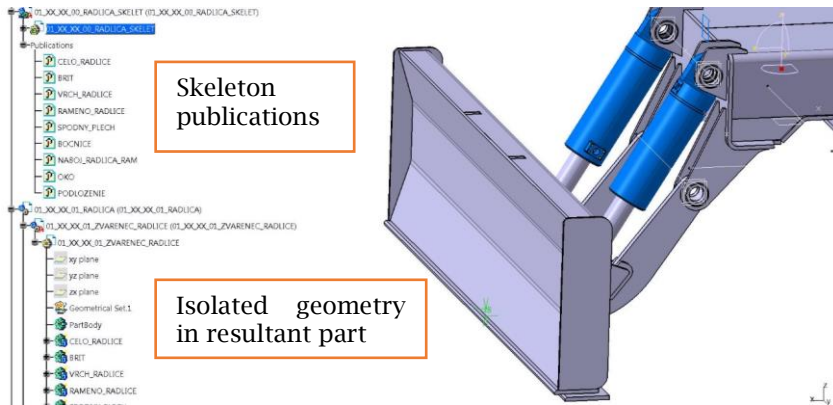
Isolated geometry of front blade weldment published from front blade skeleton.
